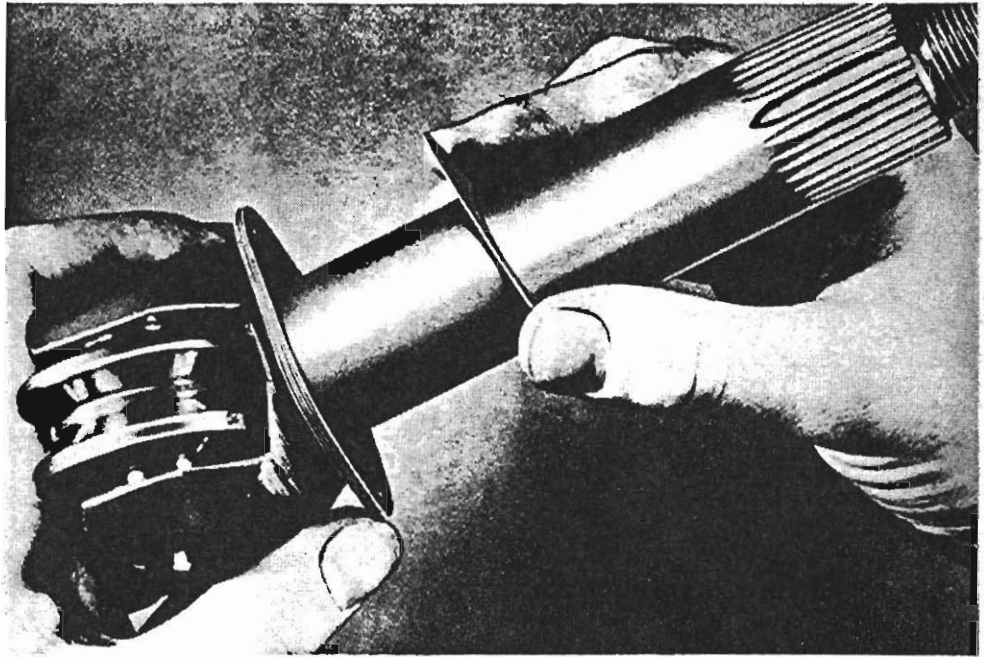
The Double-Tooth Roller Type Cross Shaft Is Adjusted by Adding or Removing Shims.
